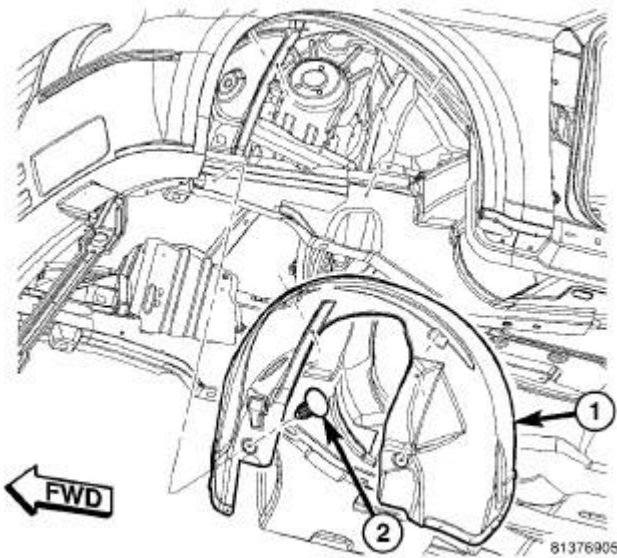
Removing/Installing Front Wheelhouse Splash Shield
